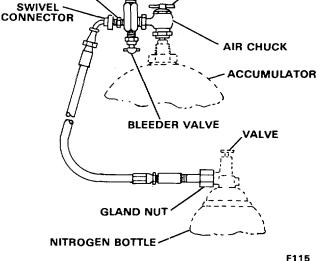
D-3. Gauging Head Installation 1. Remove the valve guard and valve cap from the accumulator.
